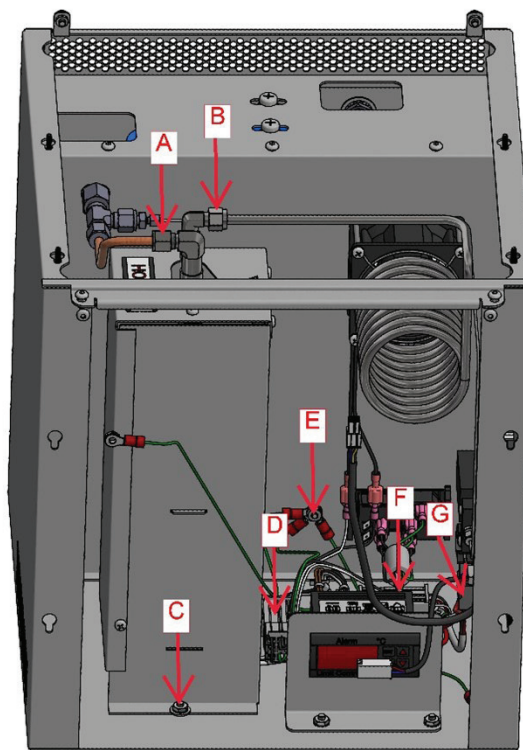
ZAG Internals with Cover, Internal Heat Shield, and Front Bezel Removed
